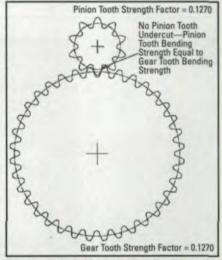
Long addendum 10-tooth pinion with standard addendum 36-tooth gear.
